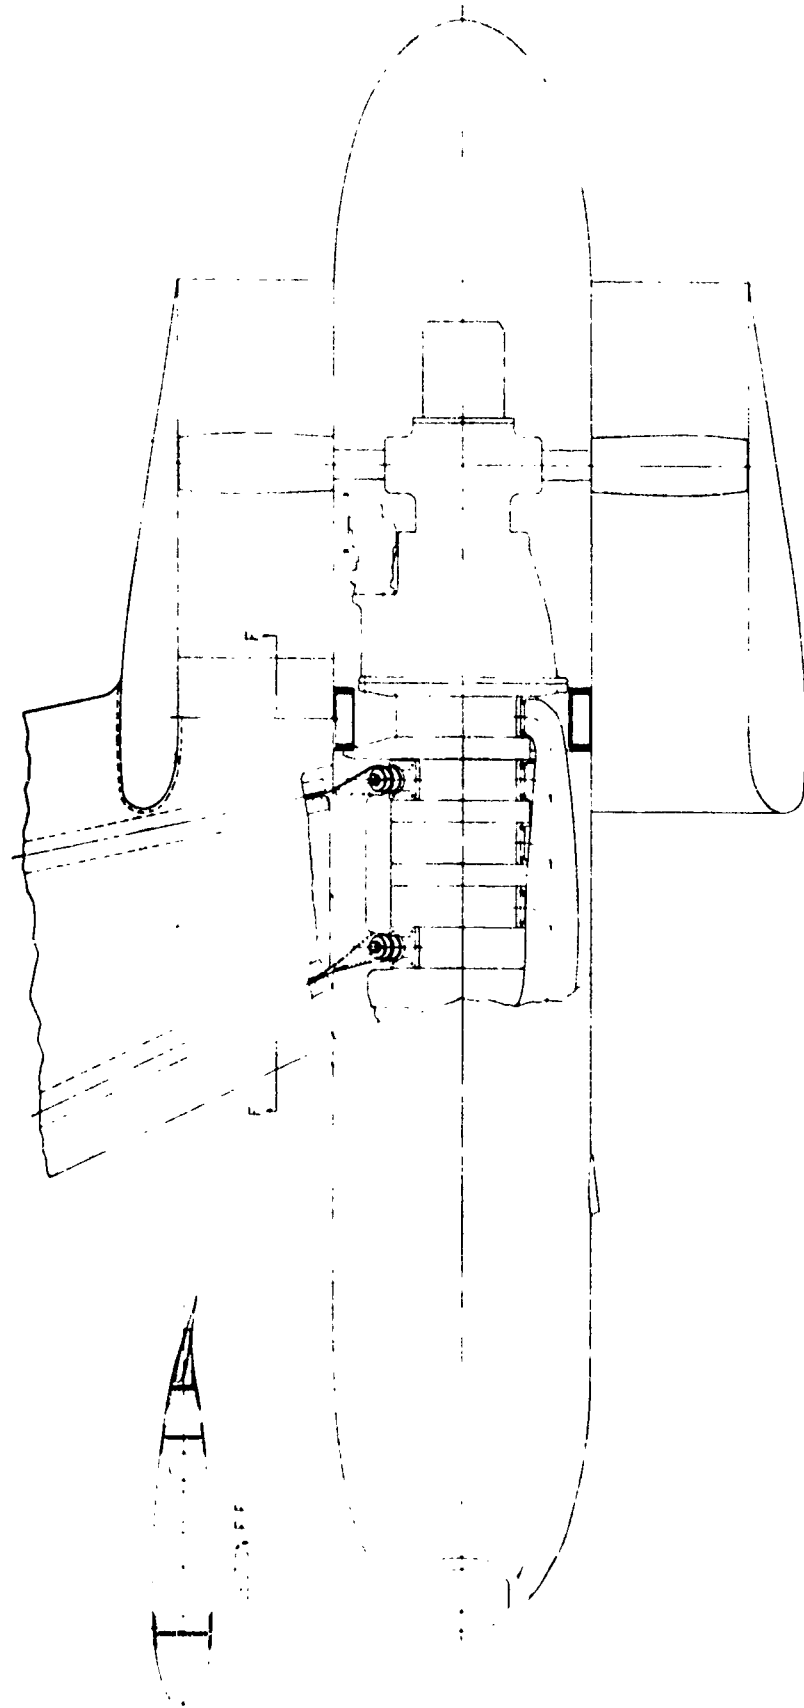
TOP VIEW OF PYLON-MOUNTED ROTARY COMBUSTION ENGINE-Q-FAN
